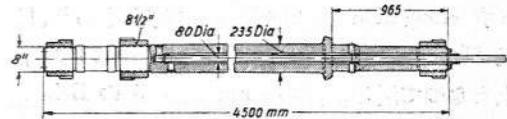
Original design of piston rod with transverse bores at top and bottom ends.
